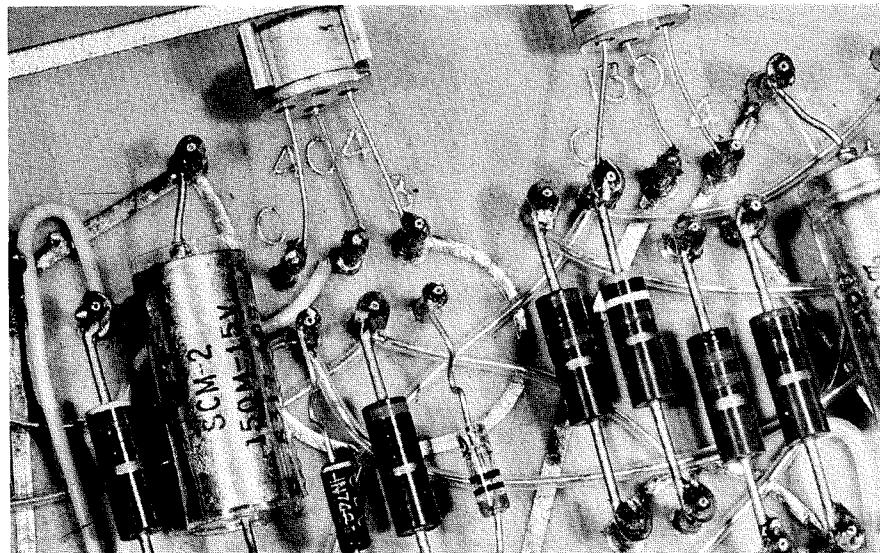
Closeup of standard extender removed from rack frame and shown in the same position used in Fig. 2; module has been removed.
